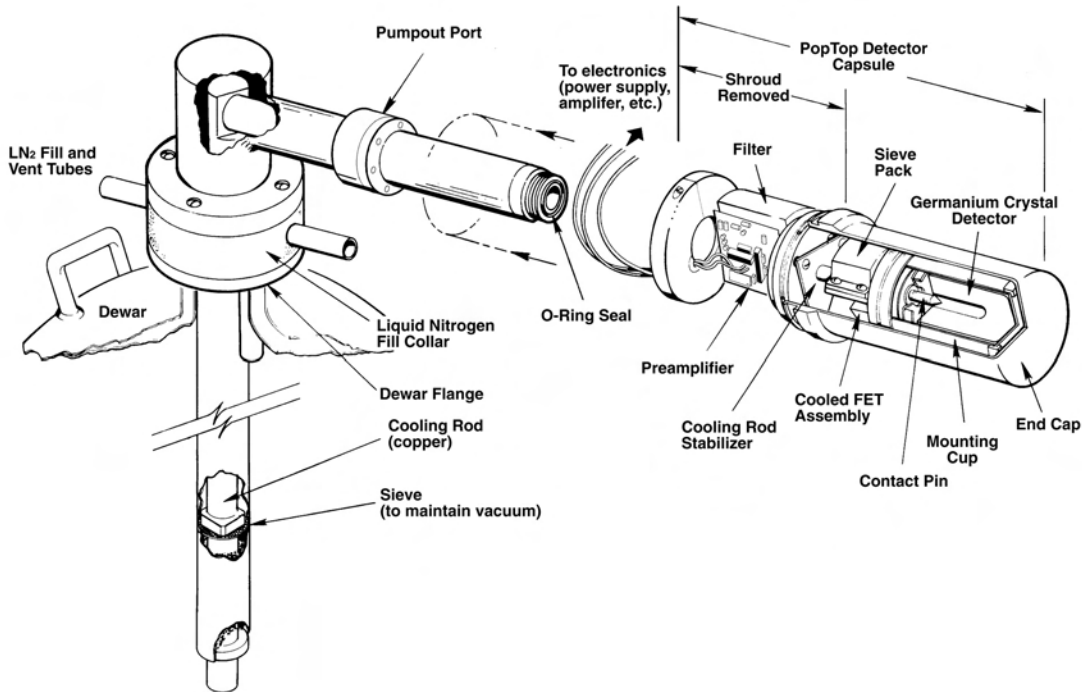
Exploded View of PopTop Detector Capsule with Horizontal Dipstick Cryostat and 30-Liter Dewar.
